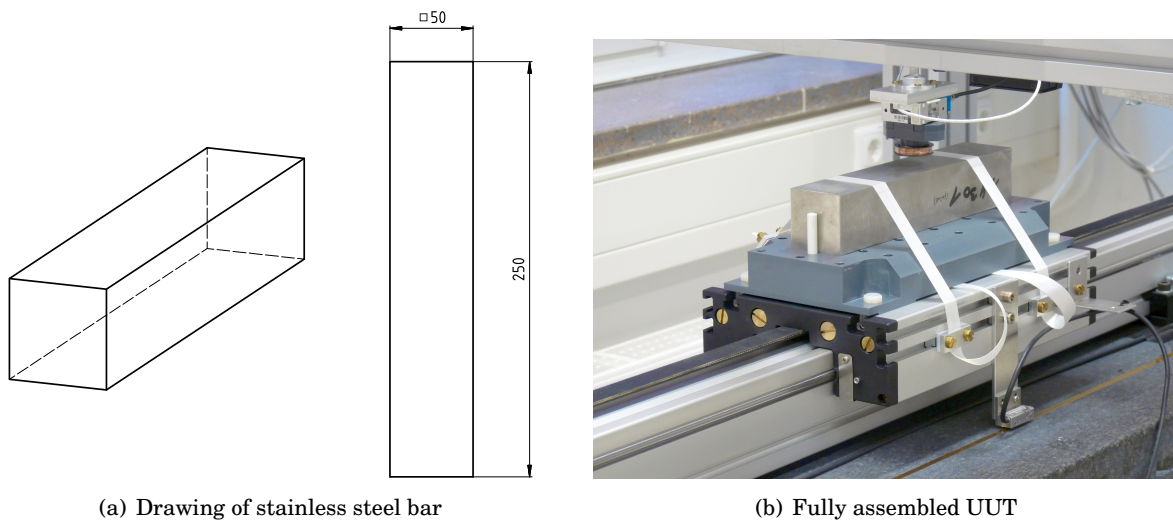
Technical drawing (a) and a photograph (b) of the mounted stainless steel bar.
